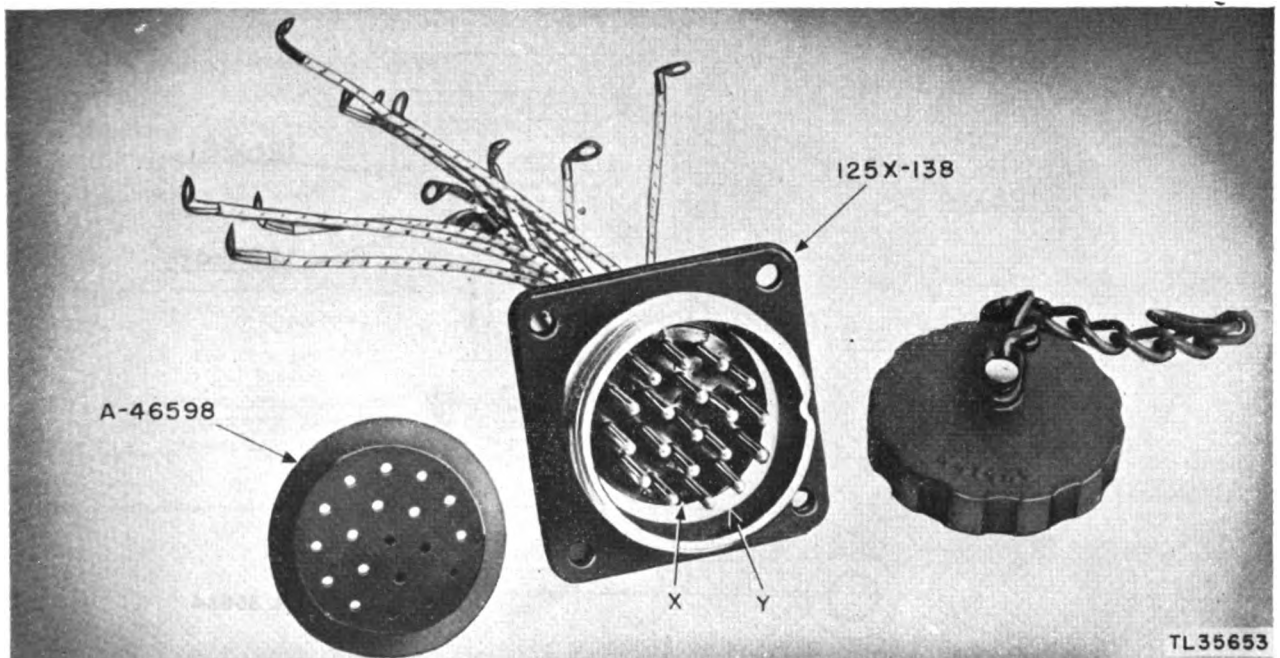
Tower TR-24-A, power cable and ordnance receptacle partially assembled.
